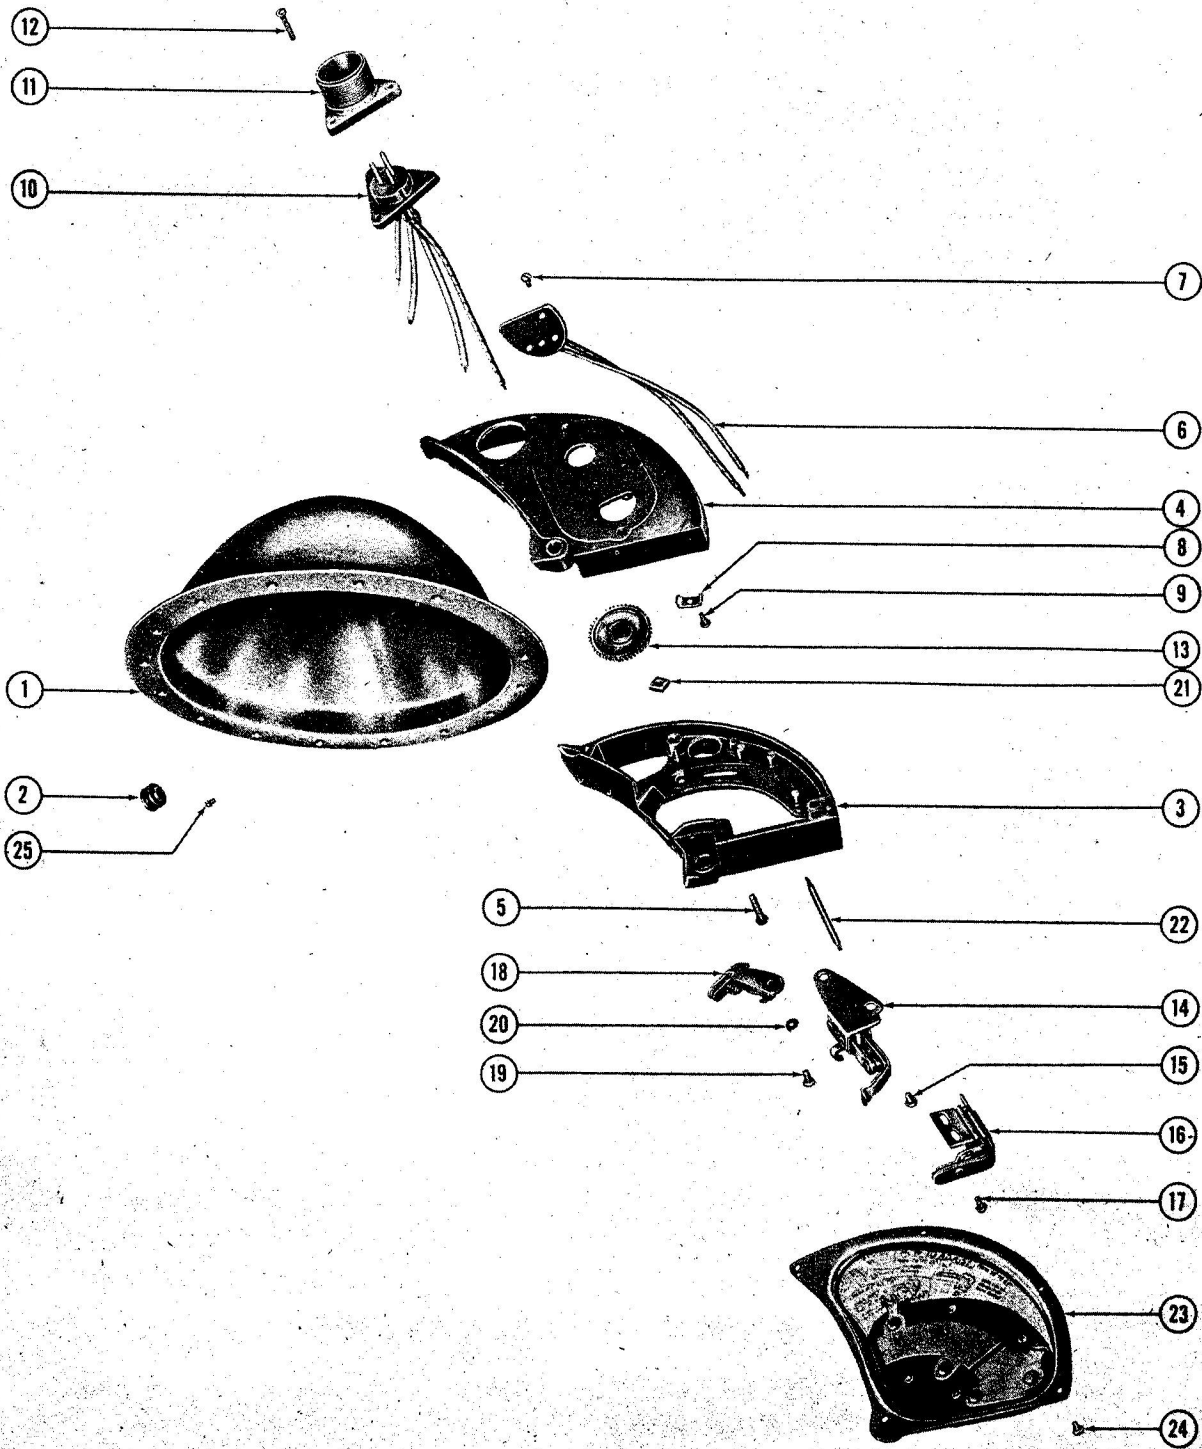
Exploded View of Outer Shell and Mechanism Assembly
